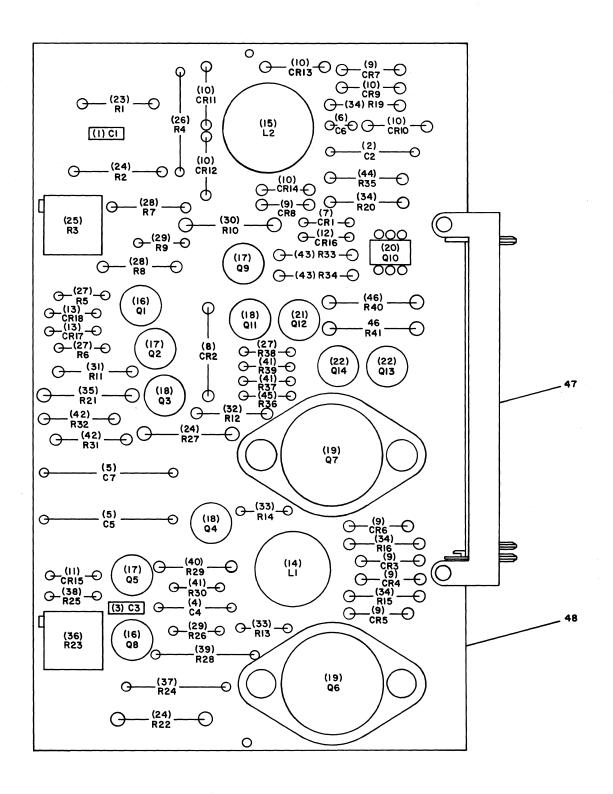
75VDC REGULATOR CIRCUIT CARD ASSEMBLY A1A2
